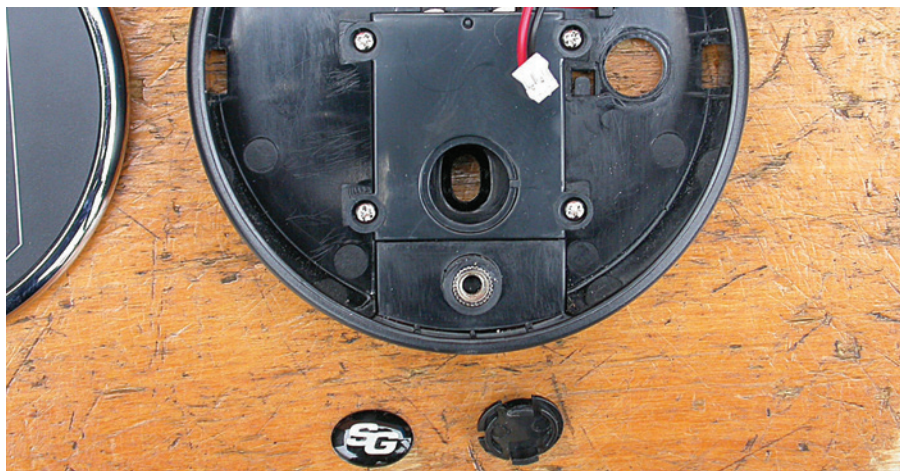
The removal of the keypad and battery holder reveals mounting screws.
